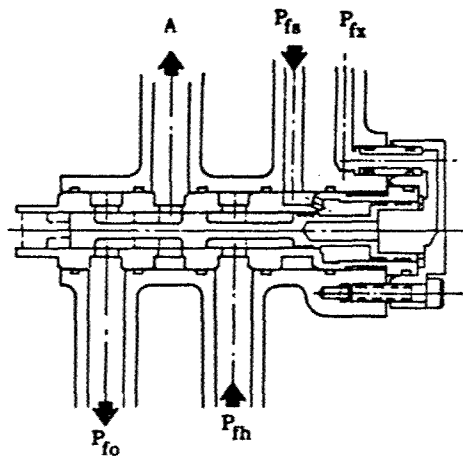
Reverser-Suppressor Control Valve Layout (Unitized Fuel and Area Control Bendix)
